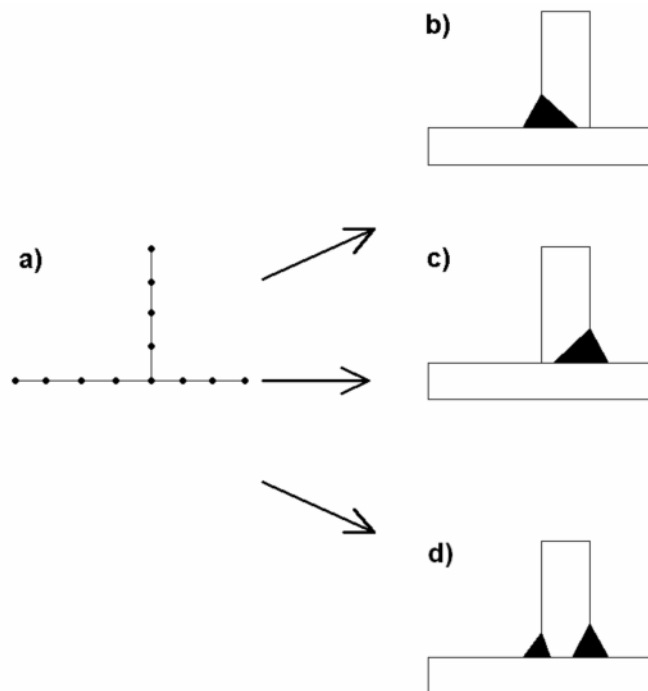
Shell-to-Solid Conversion Possibilities a) Shell Model b) Solid Model Welded from Inner Side c) Solid Model Welded from Outer Side d) Solid Model Welded from Both Sides
